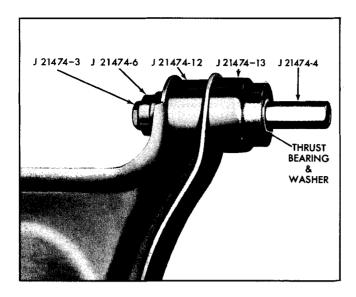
Removing Lower Control Arm Front Bushing (G, A and X Series)
